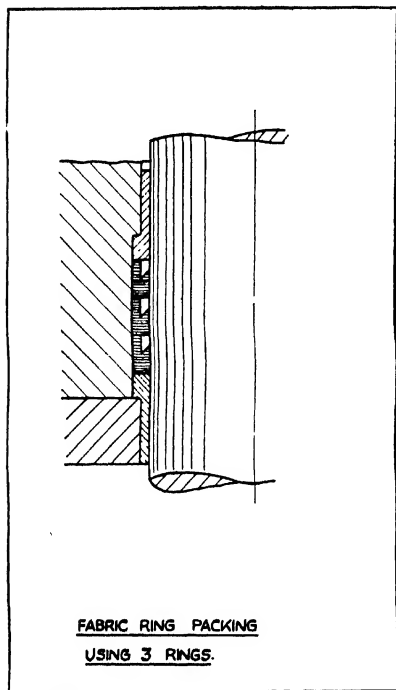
EXAMPLE OF FABRIC RAM PACKING RINGS
